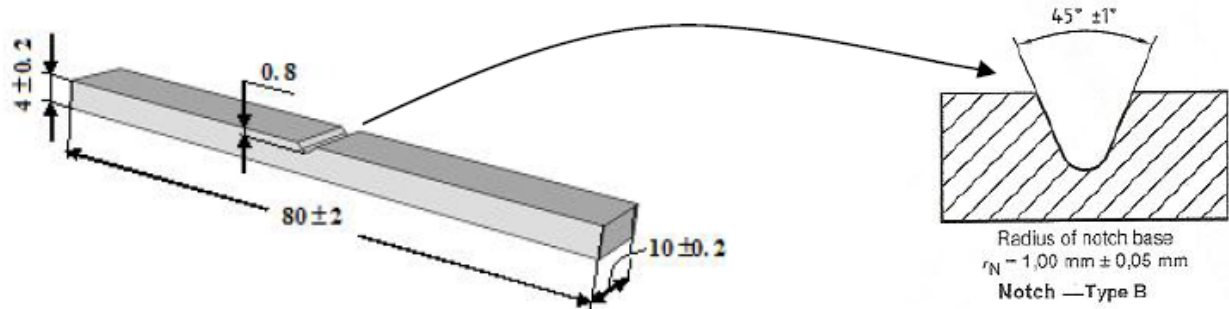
Shape and dimensions of the composite specimen used for Charpy impact test [2].
